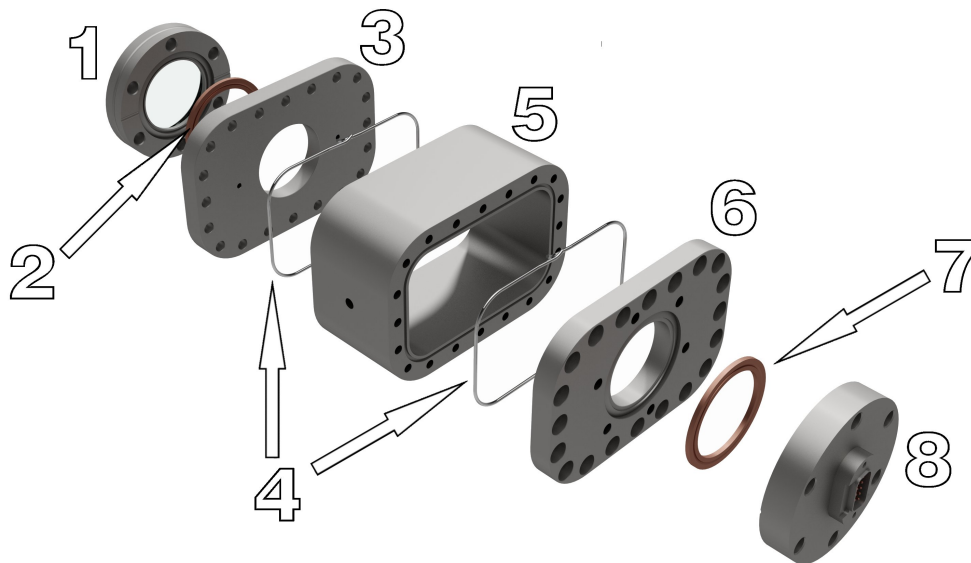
CAD exploded view of the vacuum tight camera body (screws are omitted): 1- borosilicate window on CF-40 , 2- soft baked copper gasket, 3- upper flange, 4- indium wires, 5- body piece, 6- lower flange, 7- copper gasket, 8- Sub-D feedthrough on CF-40.
